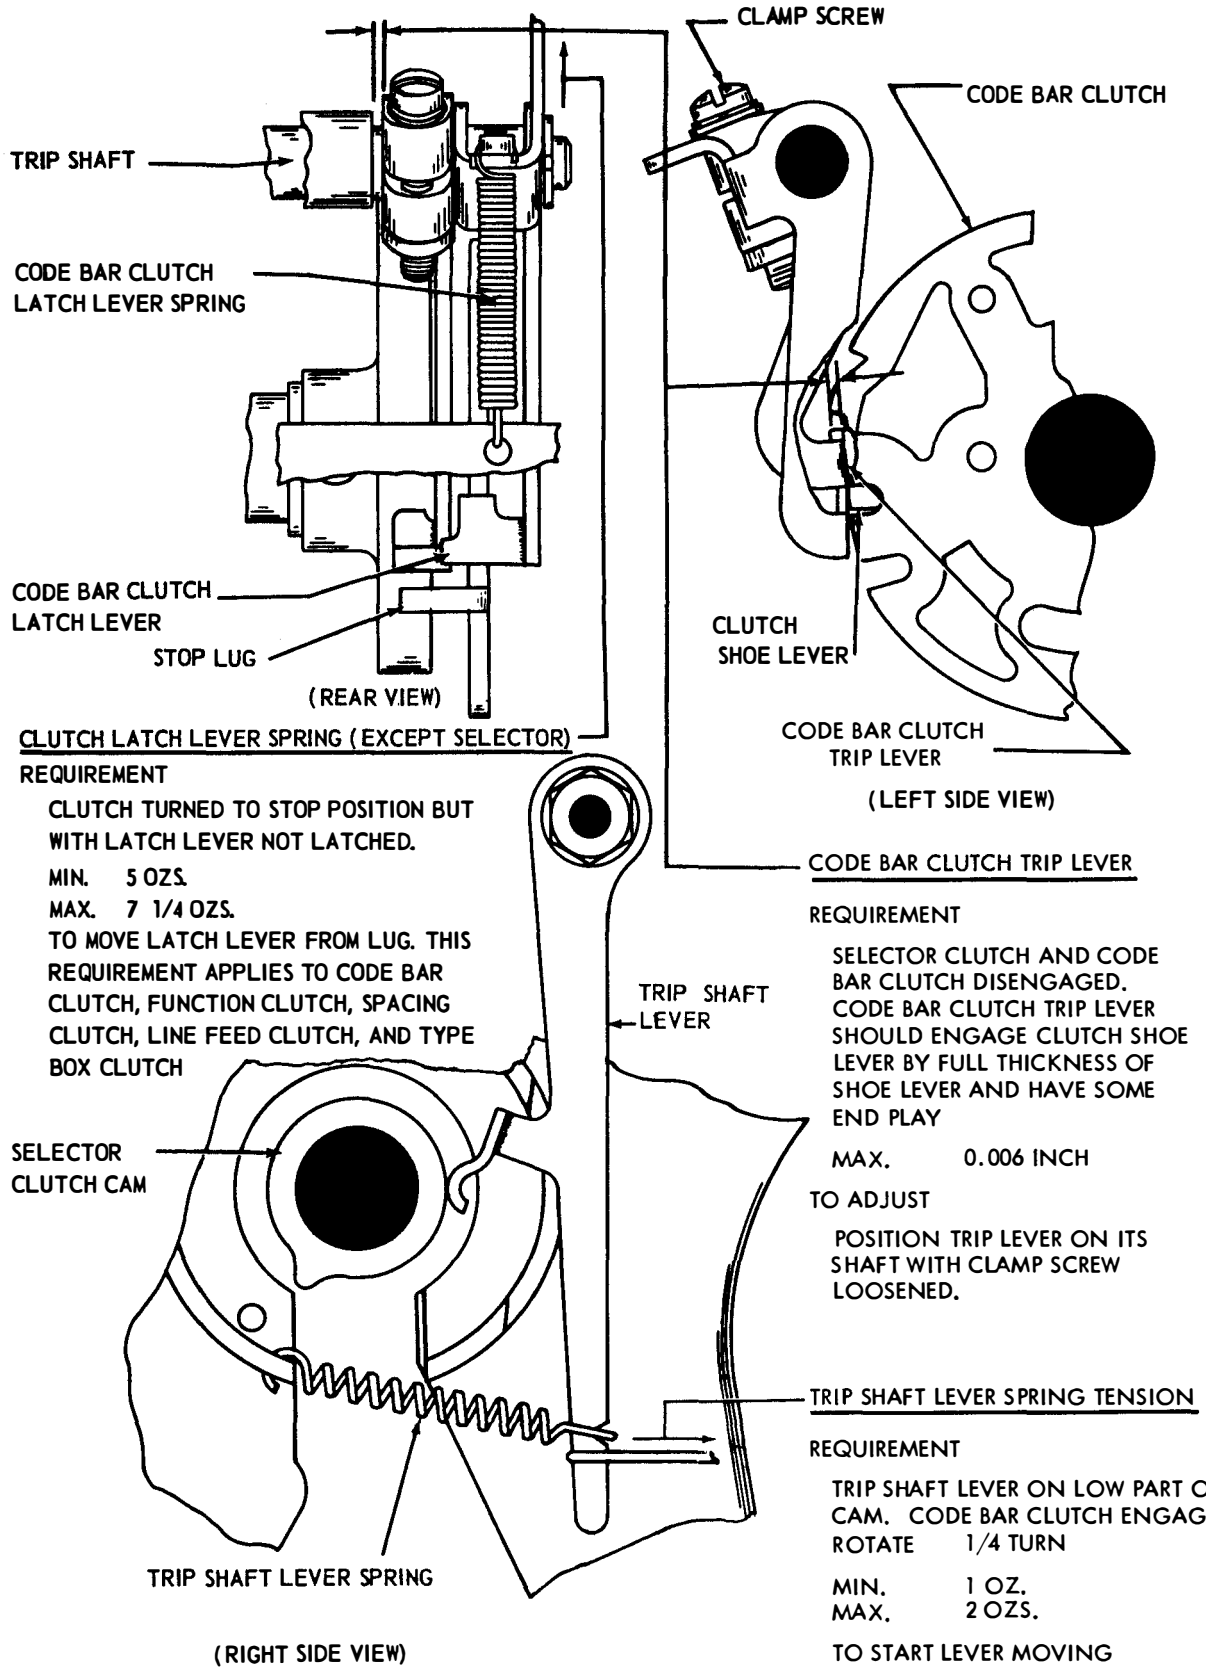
Automatic Typewriter, Code Bar Clutch Trip Shaft Mechanism
